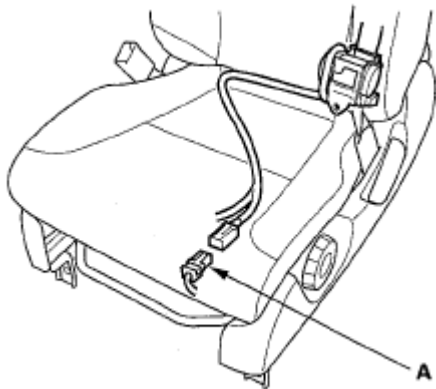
Identifying Seat Belt Tensioner Floor Wire Harness Connector
